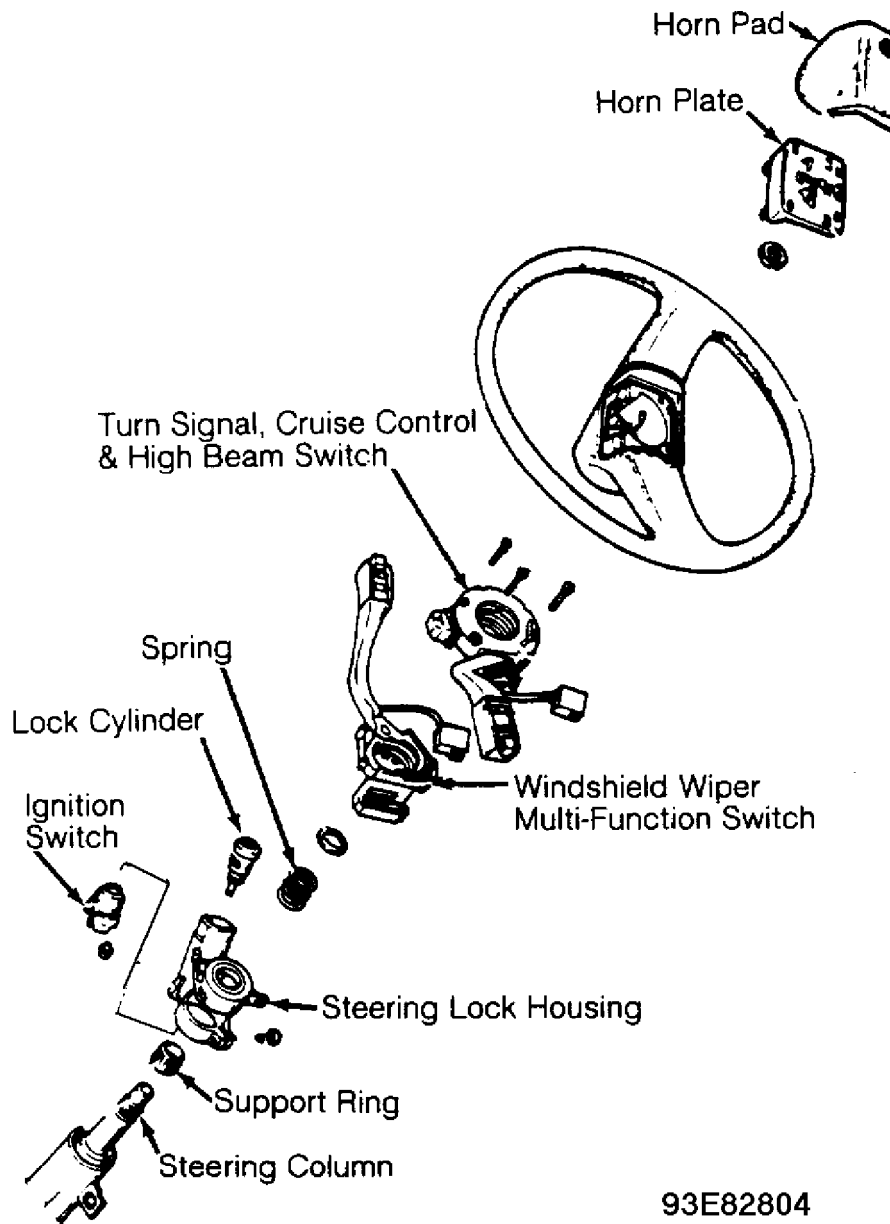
Identifying Steering Wheel Components (EuroVan)
